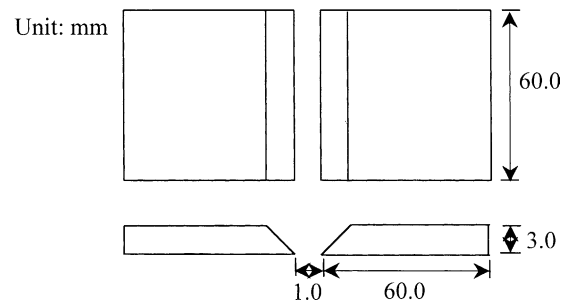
Specimen geometry for the ADB (dimensions in millimeter).
